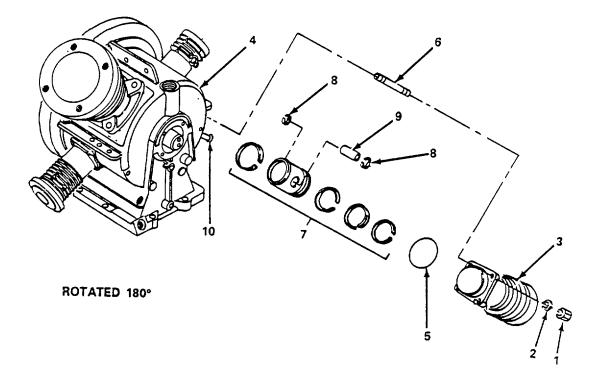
2nd Stage Cylinder and Piston, Replace.
